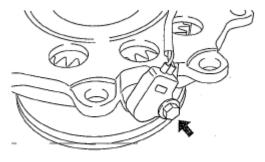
Identifying Bolts Of Counter Drive Gear Plate Courtesy of MAZDA MOTORS CORP.
